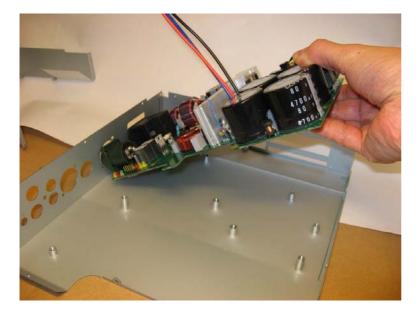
Mount the power board in the inner box. Be sure to put it in, in an angel so the surface mounted components on the backside of the PCB are not damaged.
